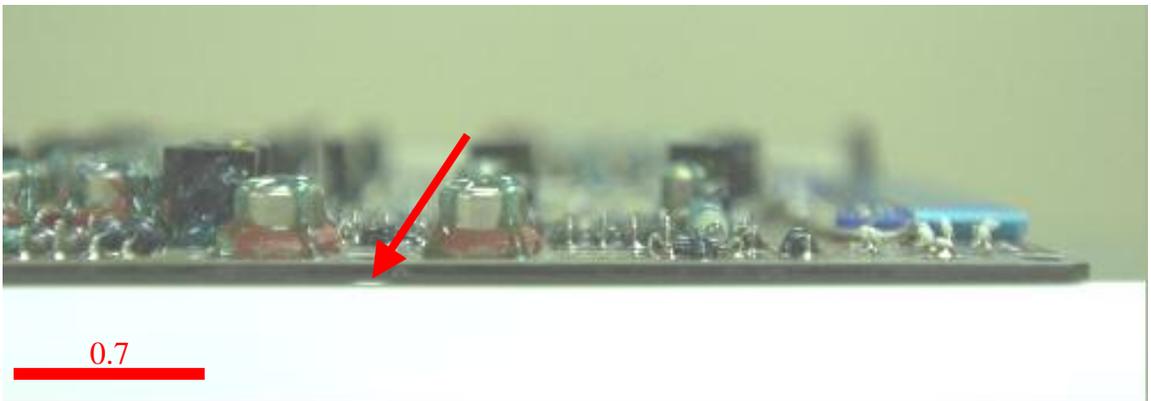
This photo shows the solder side of board #2, identification number 2559022. Visual inspection was performed on this board.
